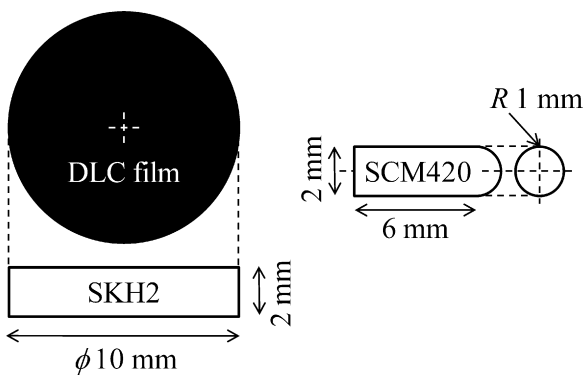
Dimensions of the DLC coated disc and the SCM420 pin.
